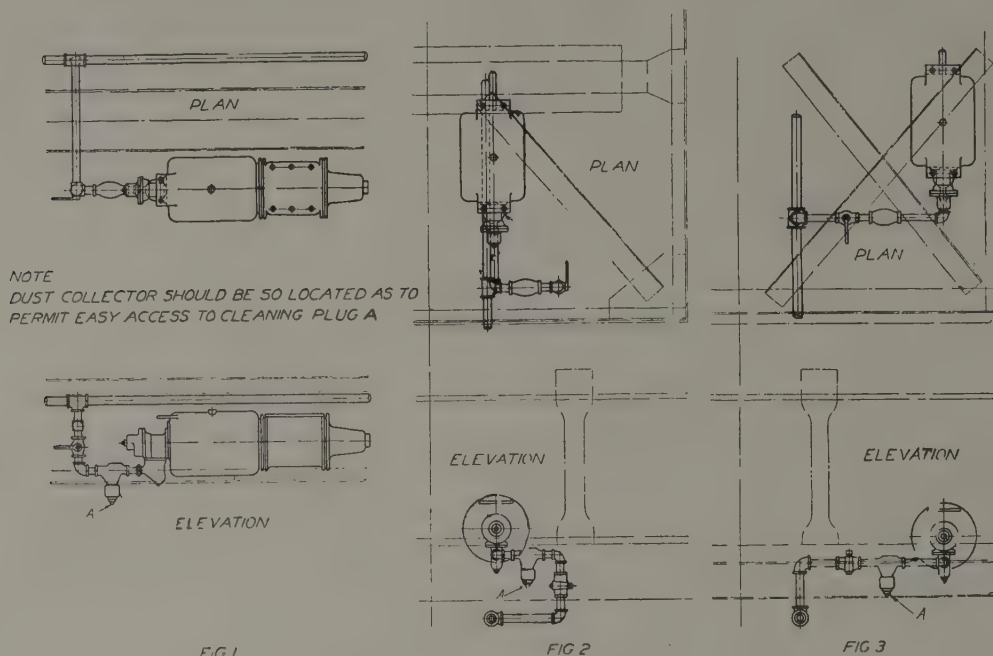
Recommended Practice for Installation of Centrifugal Dust Collector. (M. C. B. Sheet Q.)
